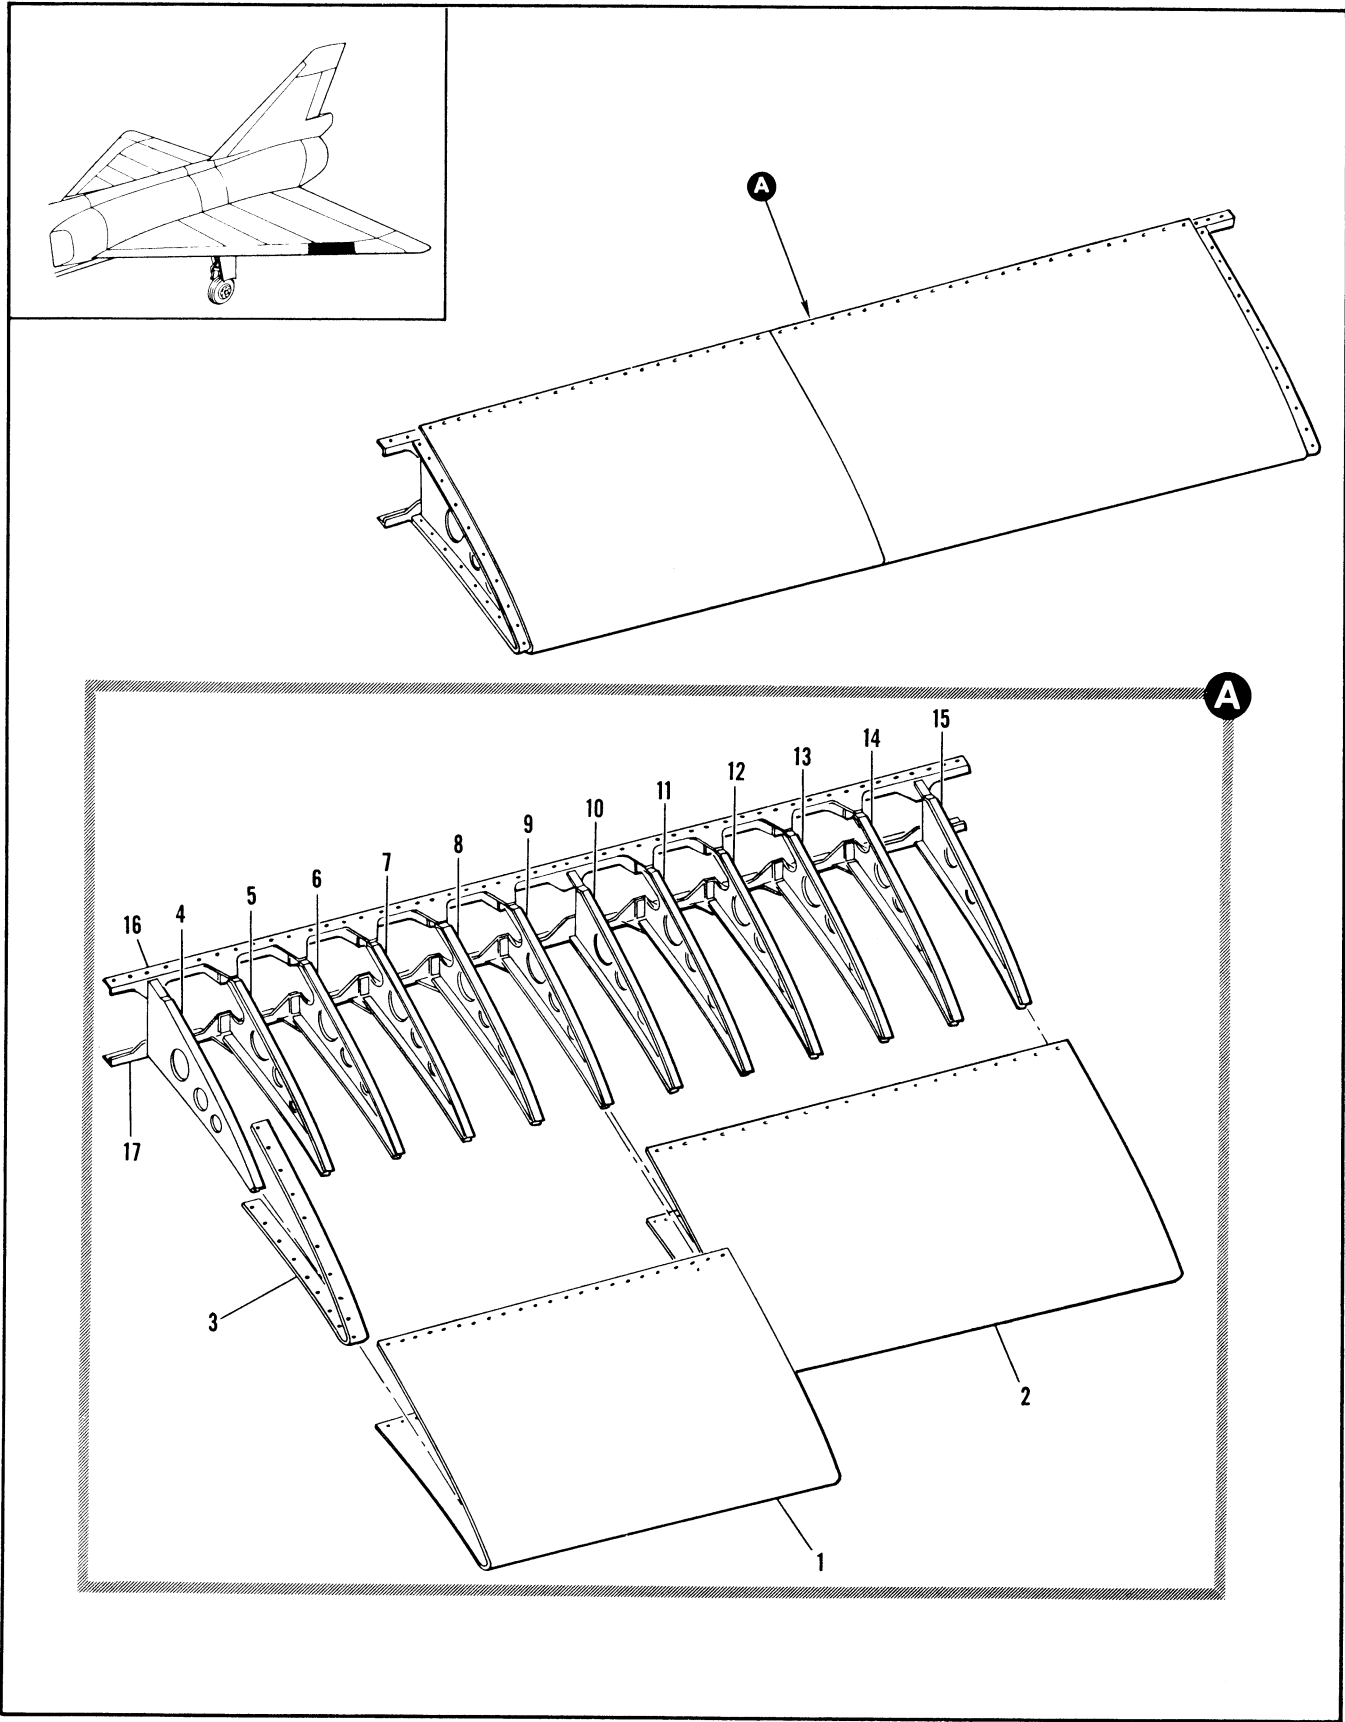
Wing Leading Edge Assembly Sta 338 to 384
